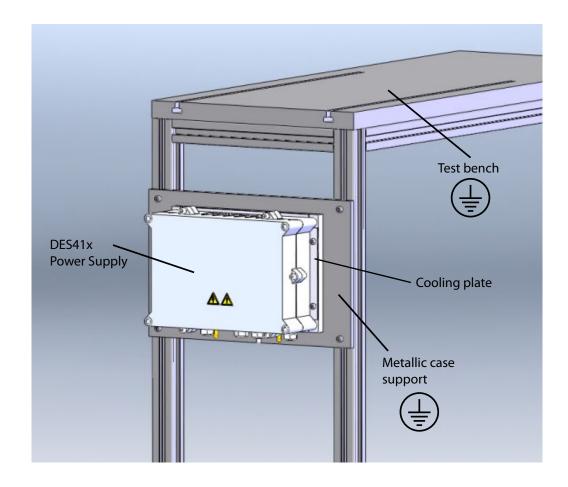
DES 411 Power Supply with cooling plate mounted to the test bench table
